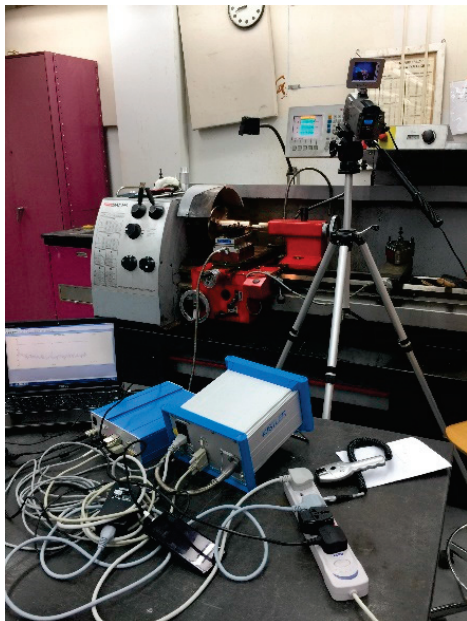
Apparatus for machining the test samples and measuring the cutting forces and temperature.
